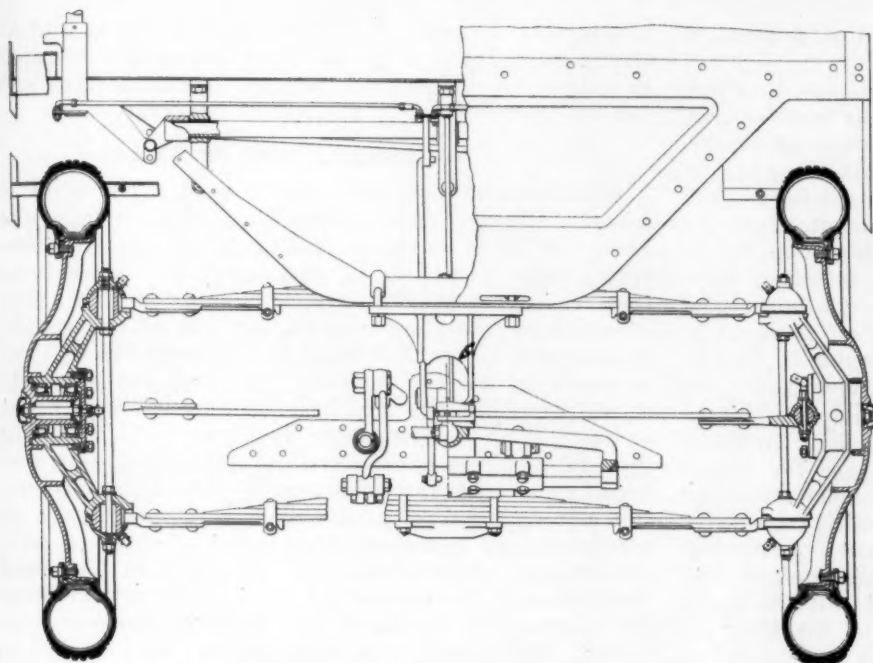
FRONT SUSPENSION AND STEERING ASSEMBLY
